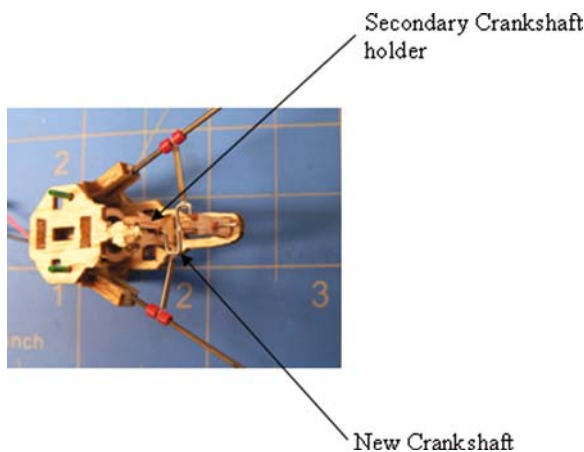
New design of the crankshaft. The frame was redesigned to accommodate the secondary crankshaft holder
